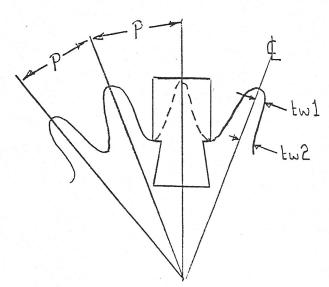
Transfer dimensions from existing teeth onto blank ofter fixing into position and trimming top and sides to shape.
